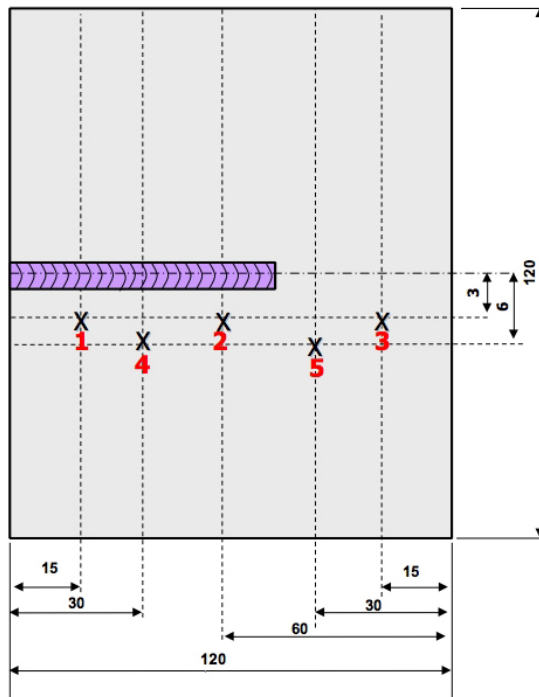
Schematic drawing showing five positions of thermocouples, attached to the weld plate
